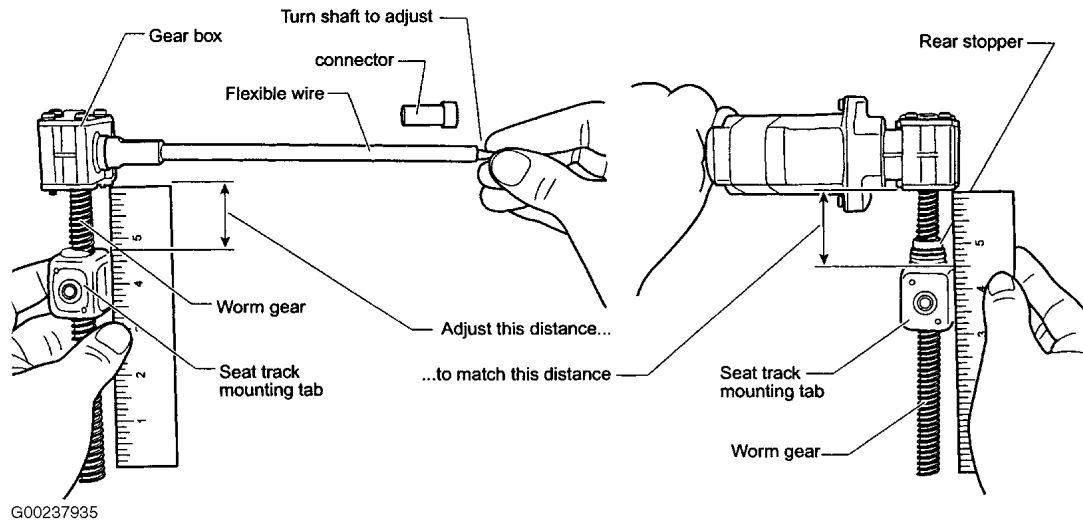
Measuring Distance Between Gear Case & Mounting Tab
